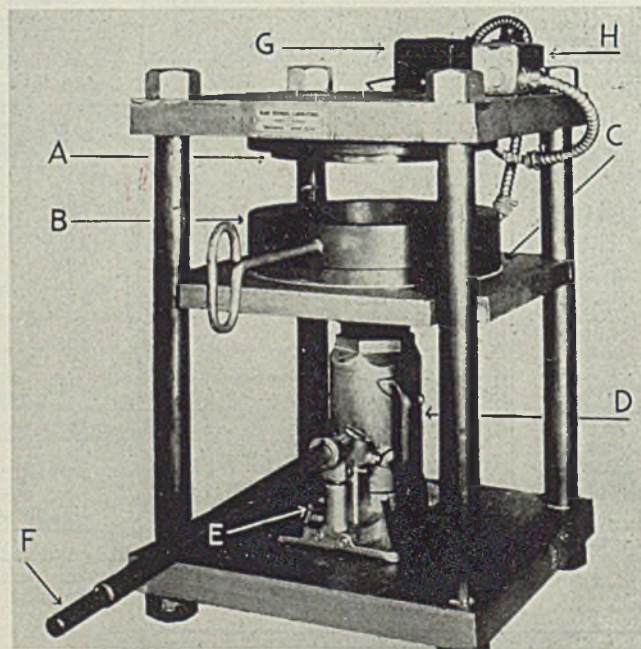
Electrically heated and automatically controlled vulcanizer for making rubber molds. A and C, plunger plates; B, removable ring; D, hydraulic jack and plunger; G, thermostat controlling heat elements; H, switch
